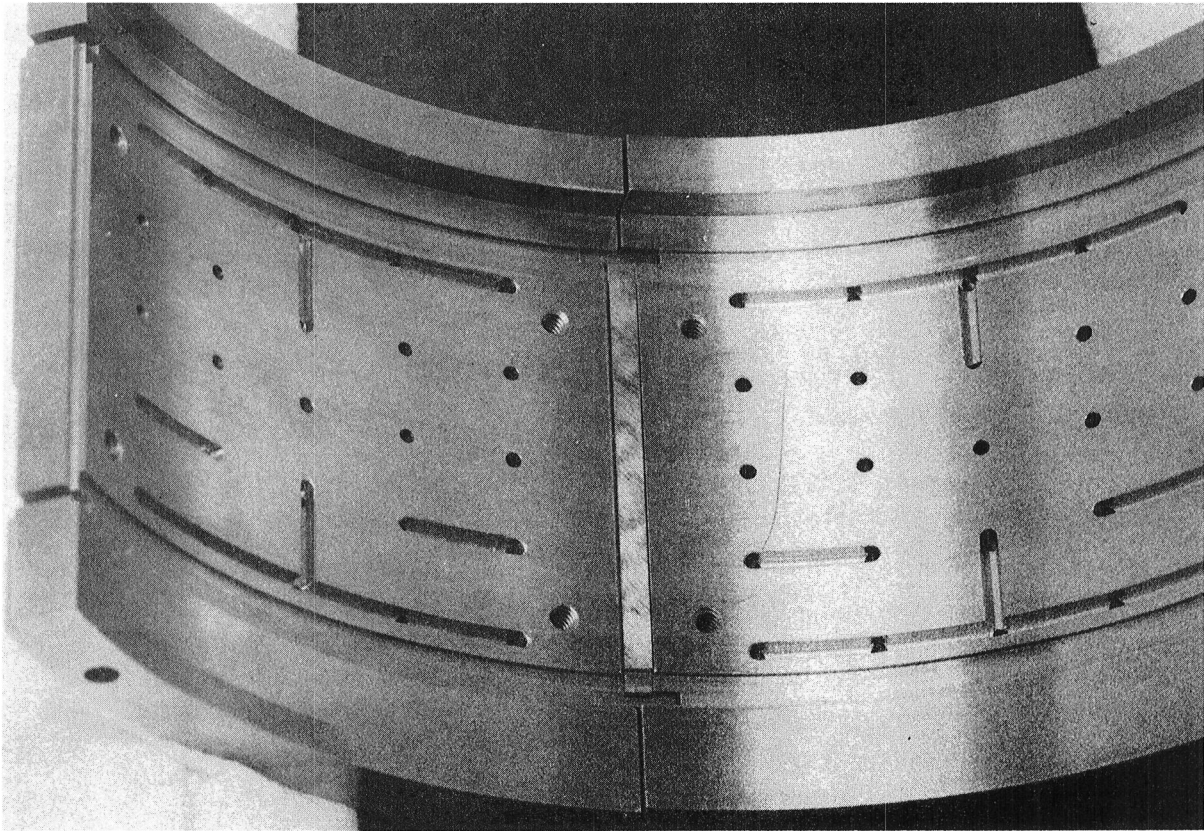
Two 25 Hole Pads Showing Interior Insert
